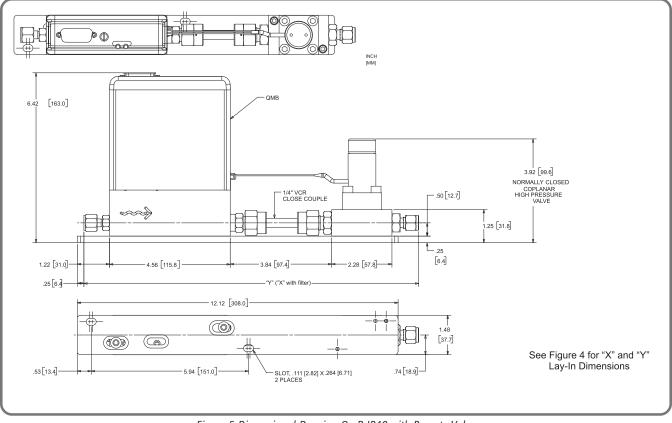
Dimensional Drawing QmB IP40 with Remote Valve
